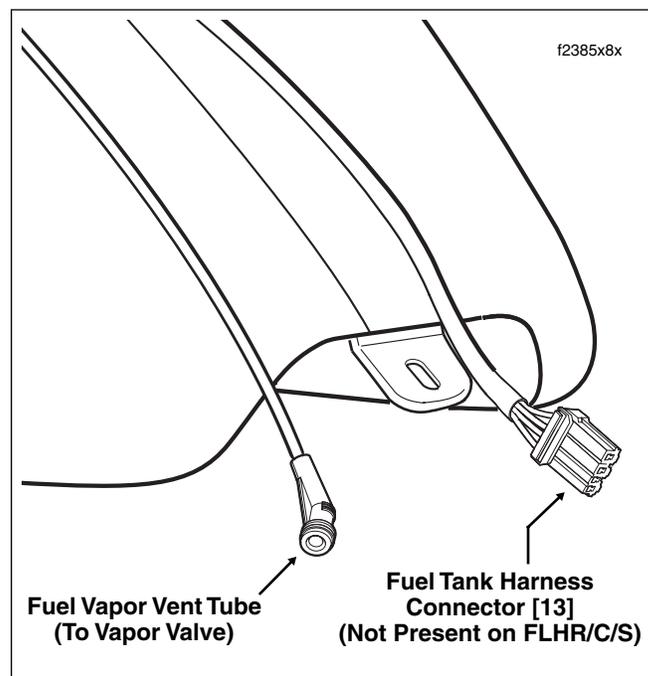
Fuel Level Sender Connector (FLHX, FLHT)
